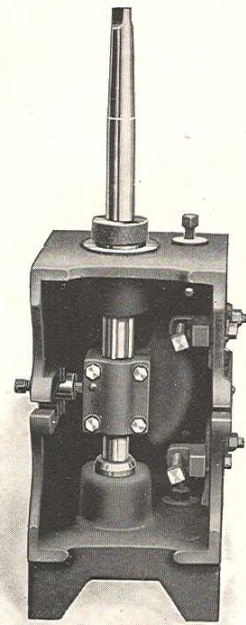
Jig for boring Double Bevel Pinion Brackets.
